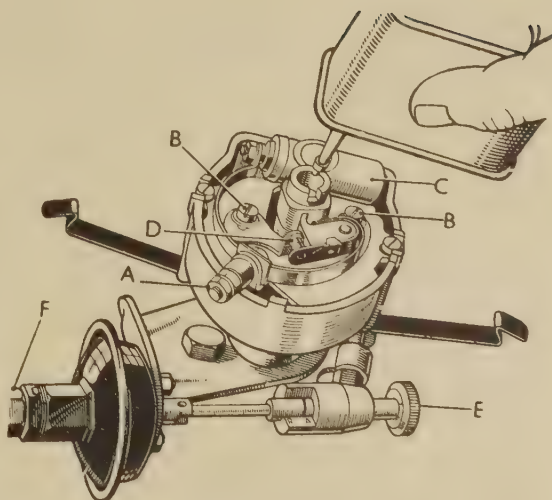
Oiling the Camshaft Bearing after Removal of Rotor Arm.
